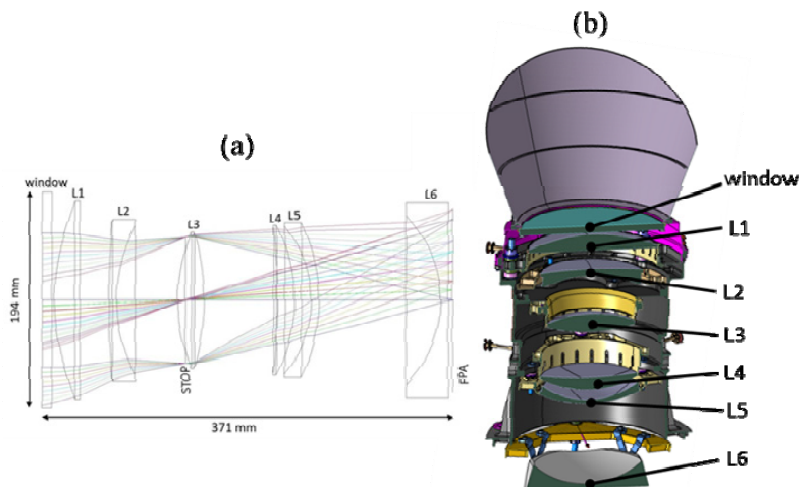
Layout of the TOU: (a) optical layout and (b) cutaway view of the opto-mechanical layout.
